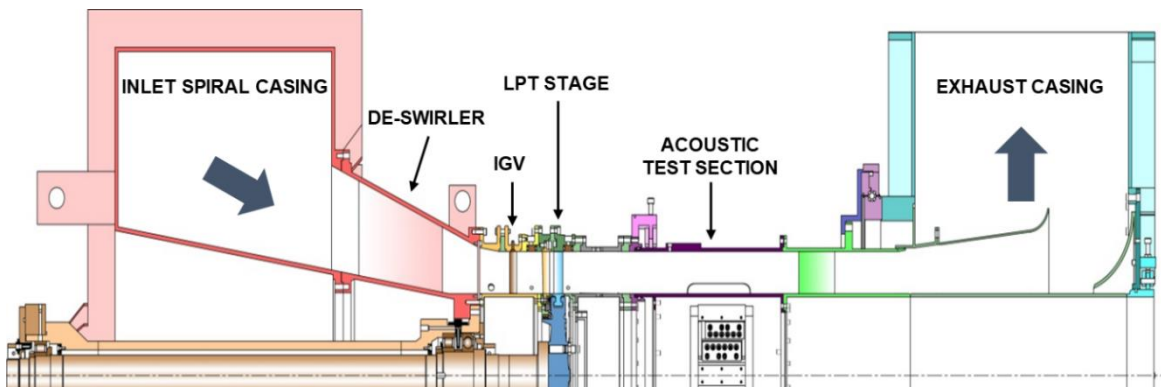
Cross-section of the subsonic test facility. STTF – AIAA.
